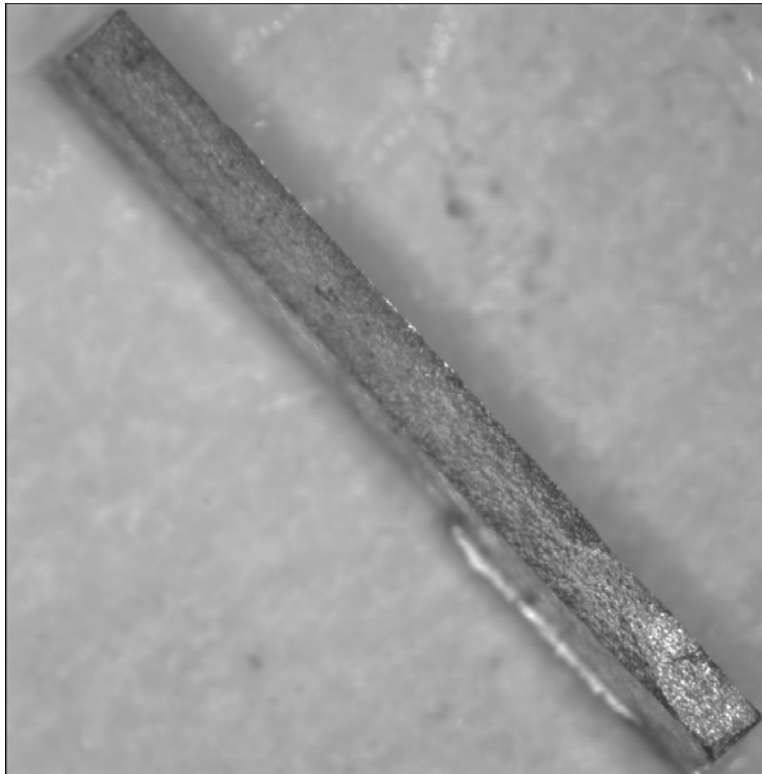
Fracture Surface of Specimen 5969.
